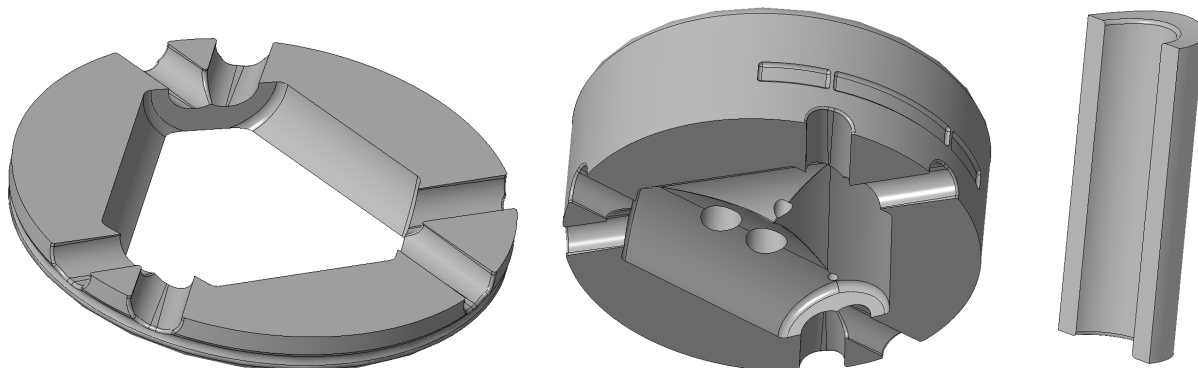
Small, large, and split lower beryllium reflector sections.
